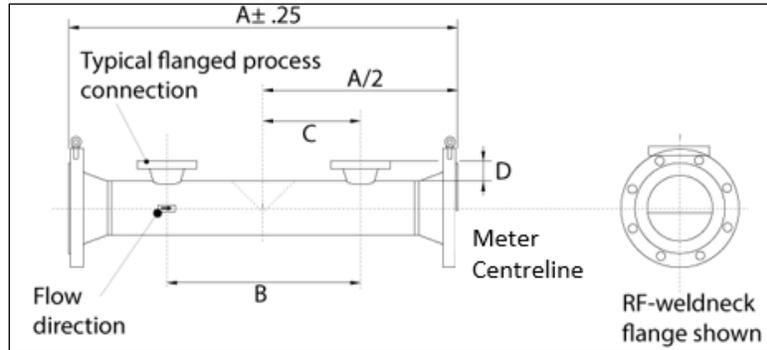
Tek-DP 1670A With Flanged Tapping's and RFWN End Flanges (4" to 24")
